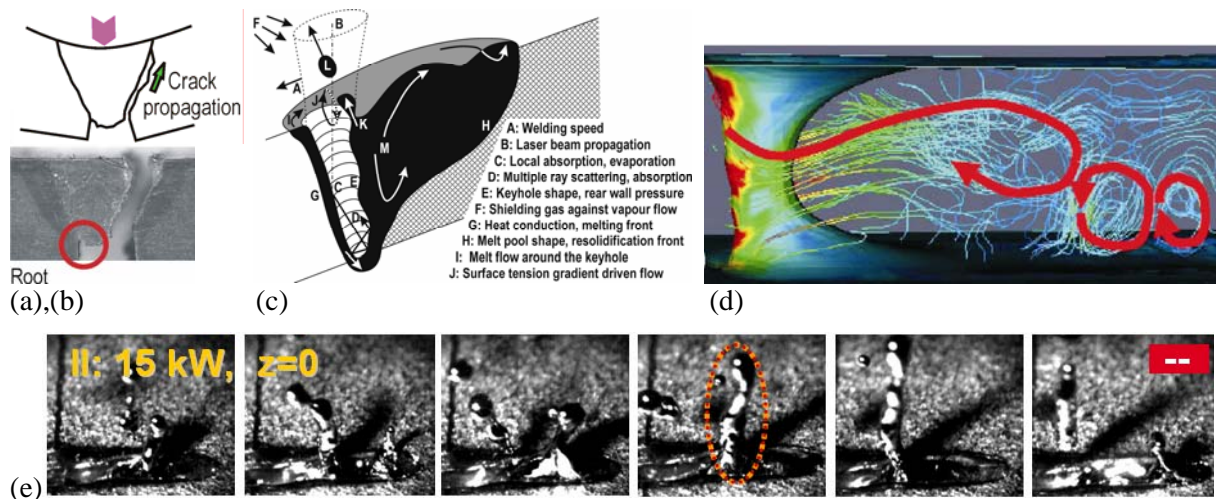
Visualisation of laser welding today: (a) Weld under load with crack propagation from a root notch defect, (b) causing fracture; Physical mechanisms (here: melt flow) in the weld pool (c) theory illustration, (d) numerical simulation (FEA/CFD), (e) high speed imaging (sequence: spatter ejection)
